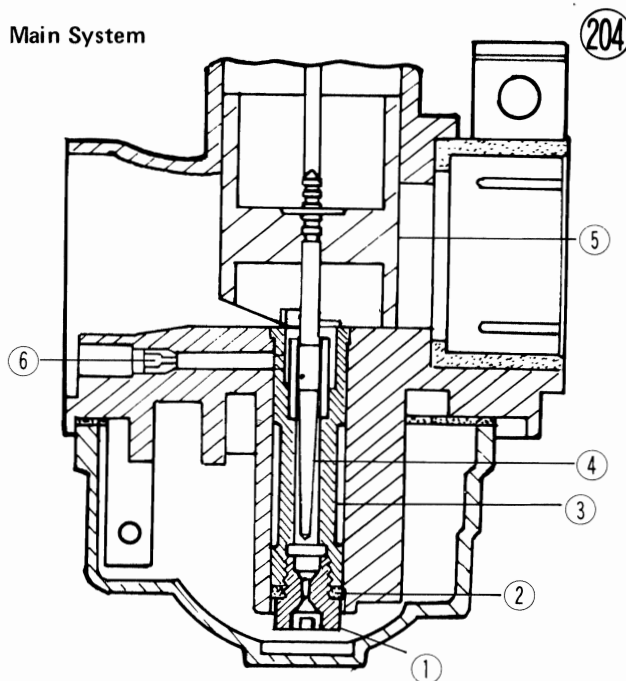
shows the main system, which consists of the main jet (1), needle jet (3), jet needle (4), throttle valve (5), and air jet (6).
